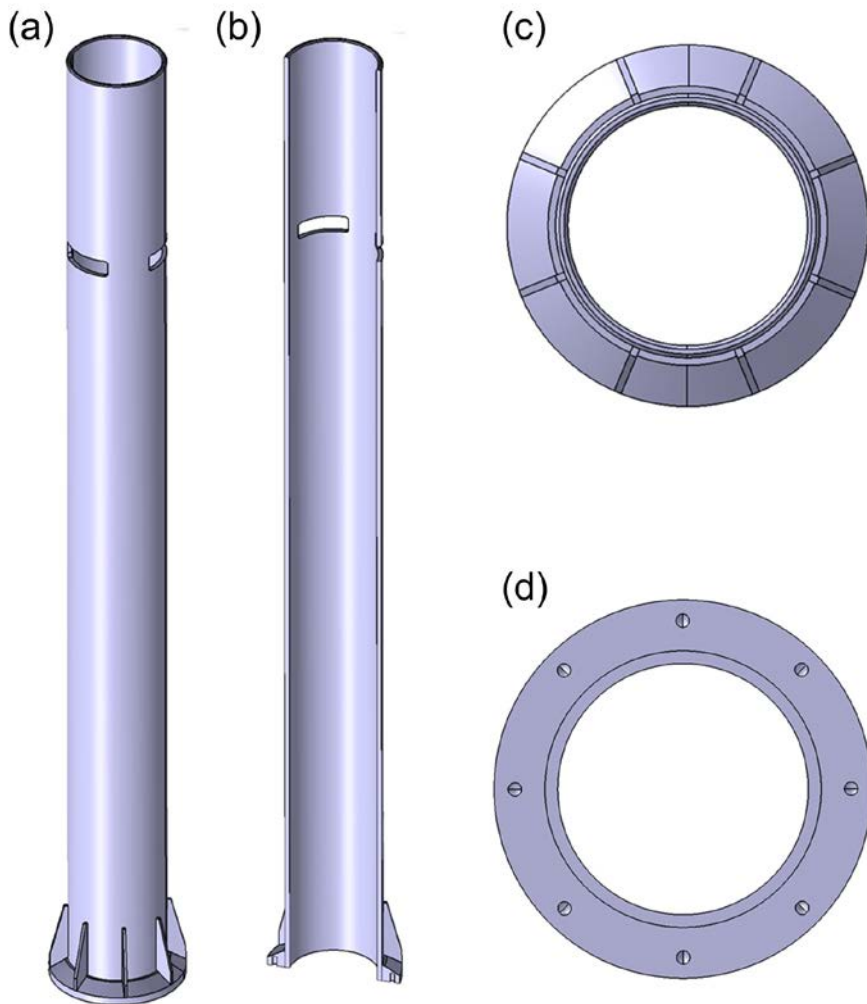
Three-dimensional model of PILLAR upper barrel in several viewpoints. (a) Isomeric view, (b) cross-sectional view in axial direction, (c) top view, and (d) bottom view
